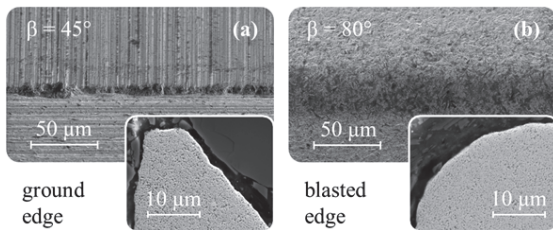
(a) Ground cutting edge; (b) blasted cutting edge.
